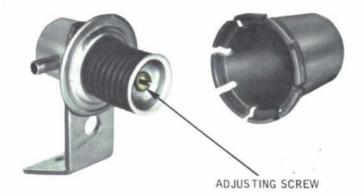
Distributor Vacuum Advance Control Valve Adjustment
